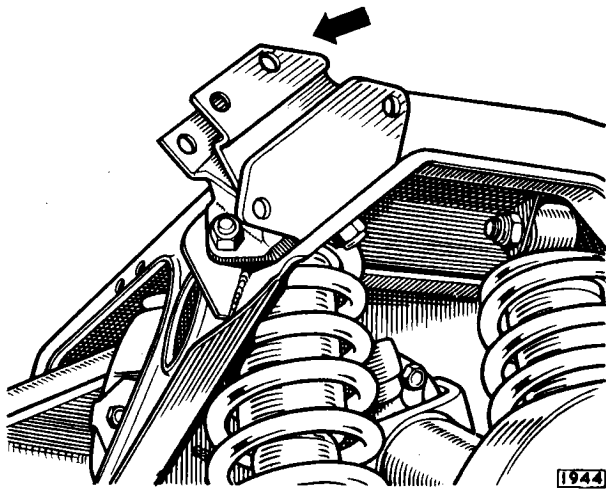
Showing the correct position of the rear suspension mounting rubber
